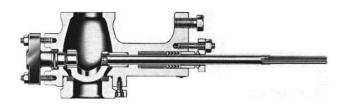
Profiled ball valve with protecting inlet nozzle *Courtesy of Emerson Process Management
